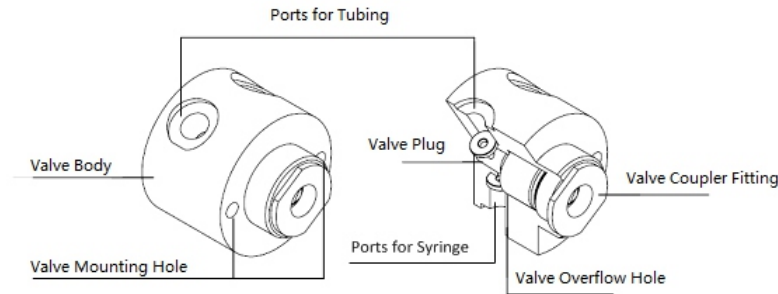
SP1-CX Valve Replacement (3-Port Valve)
